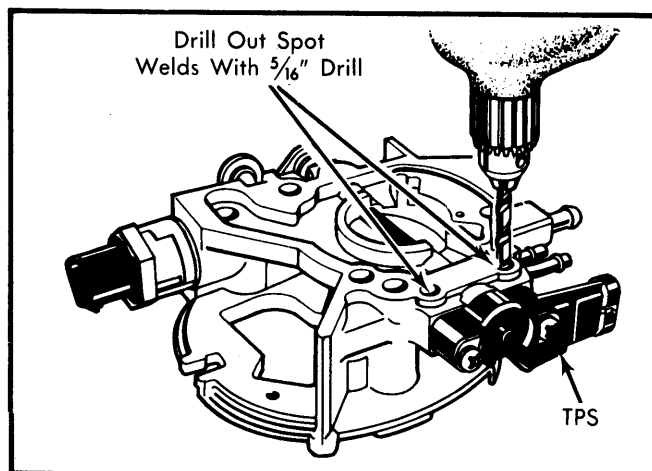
Removing TPS Assembly (Throttle Body Inverted)
